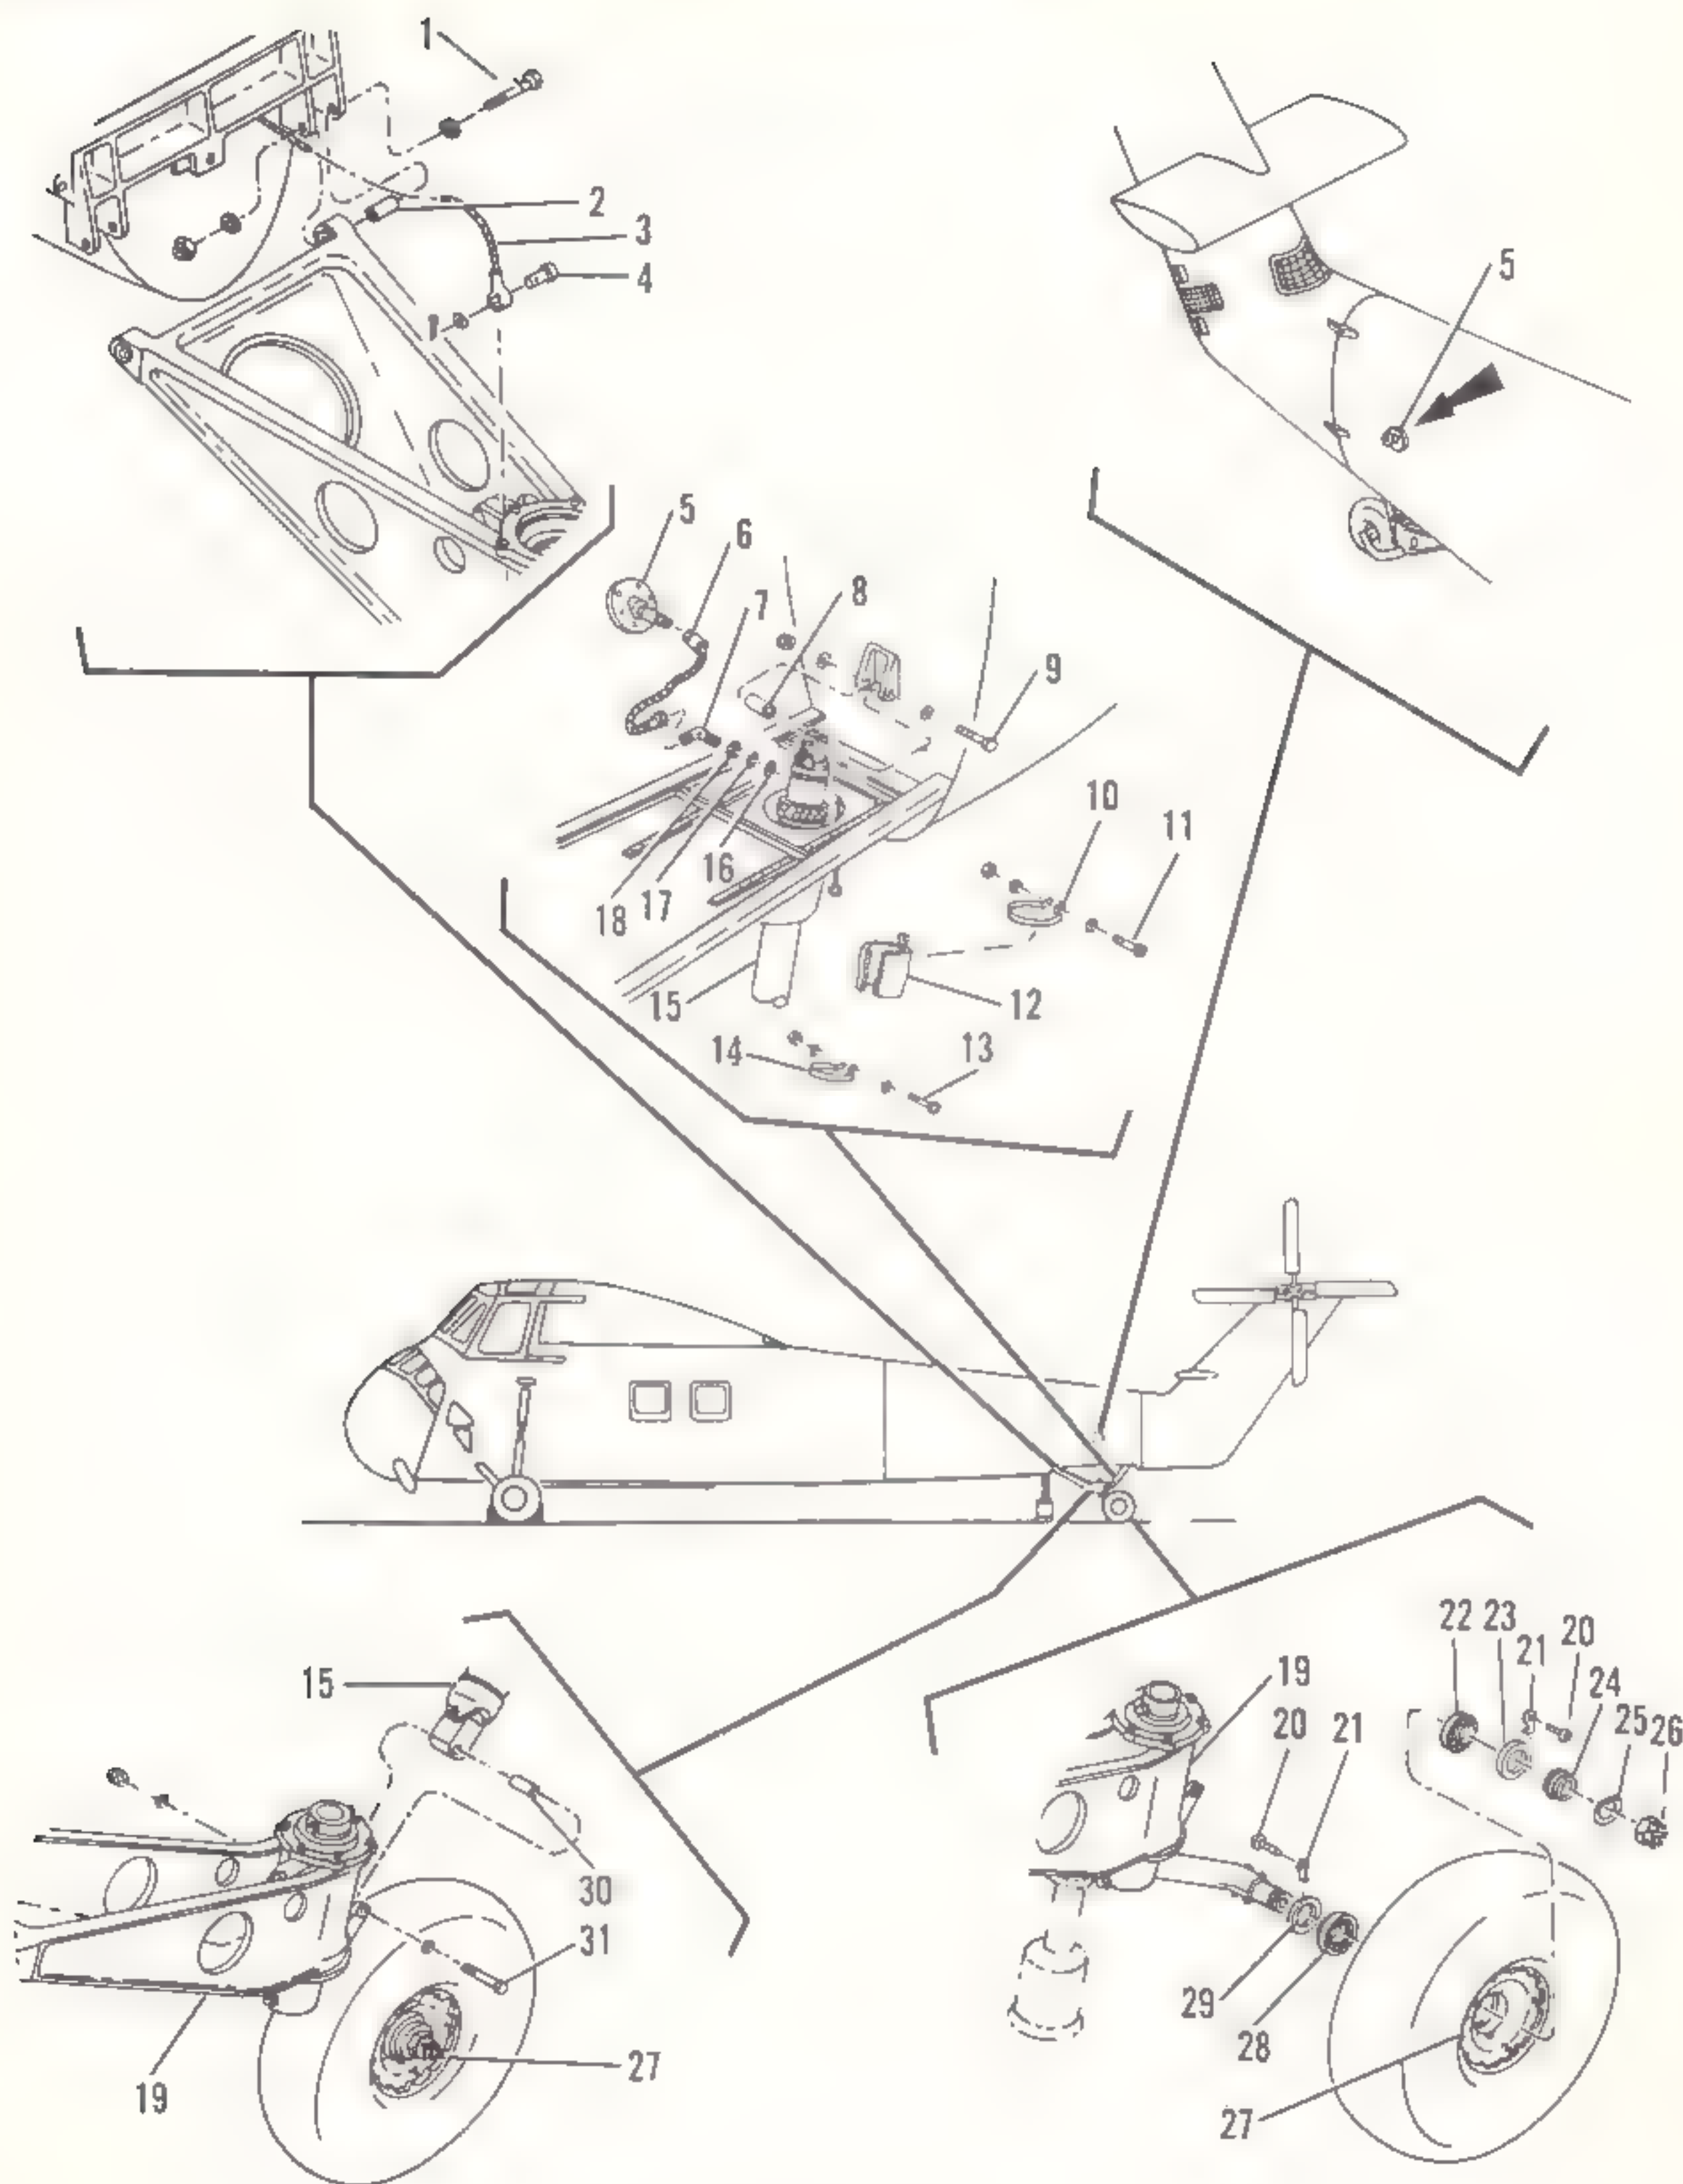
Tail landing gear assembly installation (Sheet 1 of 2)
